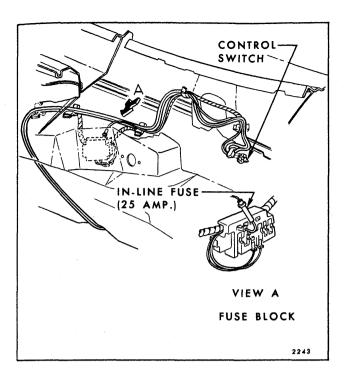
Electric Folding Top Front End Wiring -Corvair
